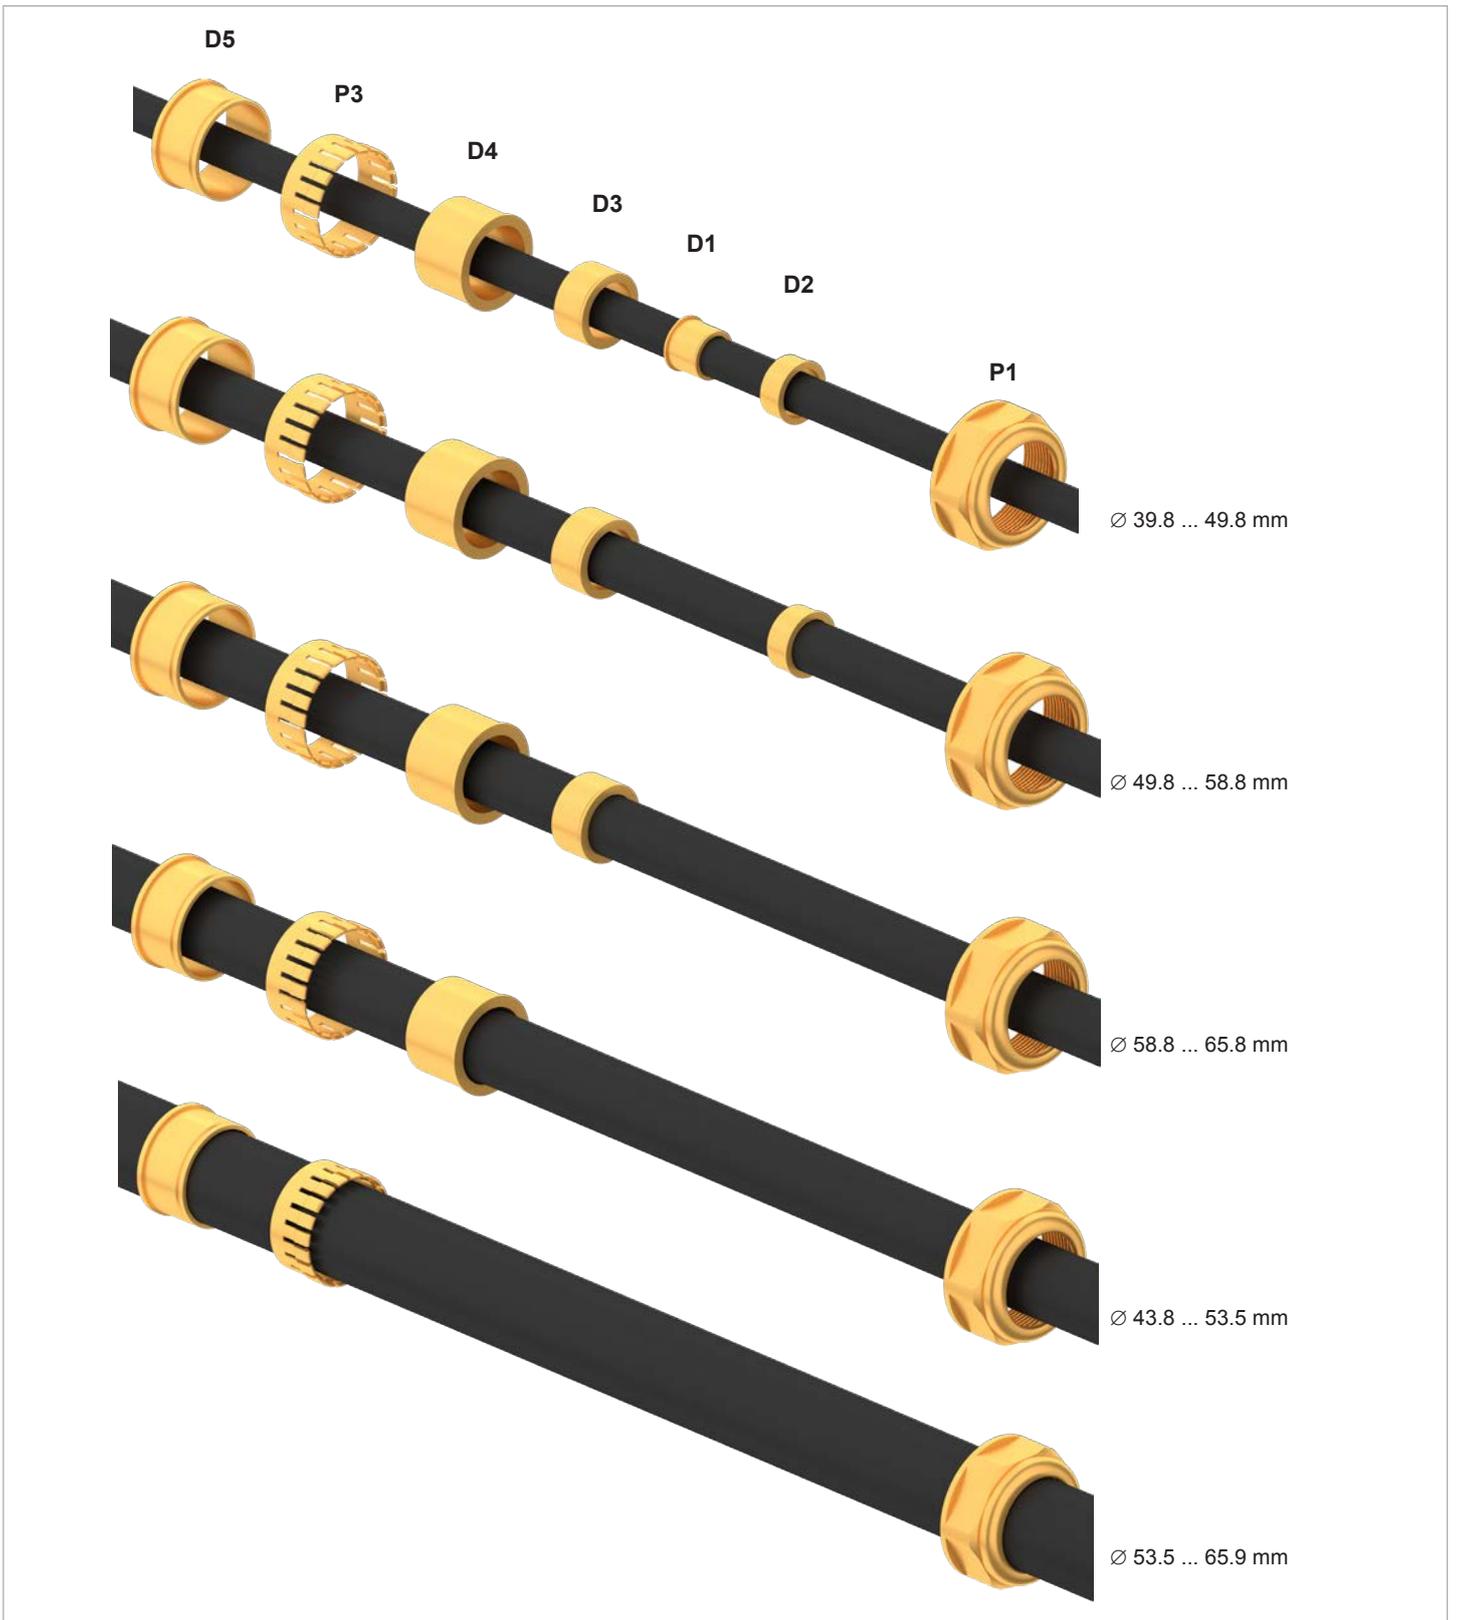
AC cable gland, assignment of the sealing rings to the cable diameters
